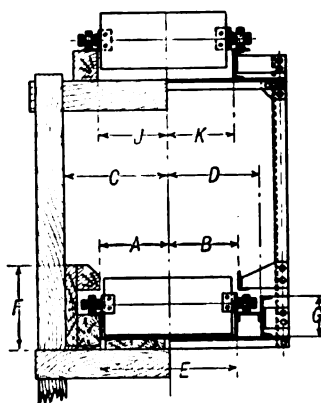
TWO-STRAND FLIGHT CONVEYOR WITH STEEL ROLLER CHAIN.—TABLE 7.
